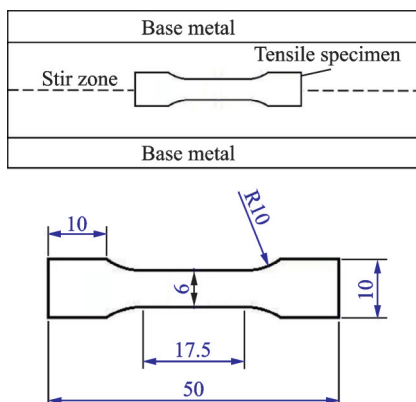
Schematic diagram of cutting position and size of tensile specimen
